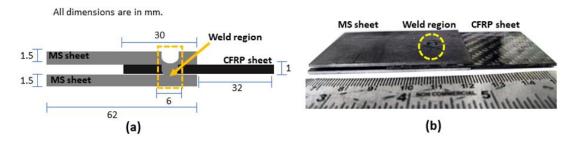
a) Schematic diagram of Sandwich CFRP 1mm with mild steel join by Resistance spot welding b) Sample for shear test
